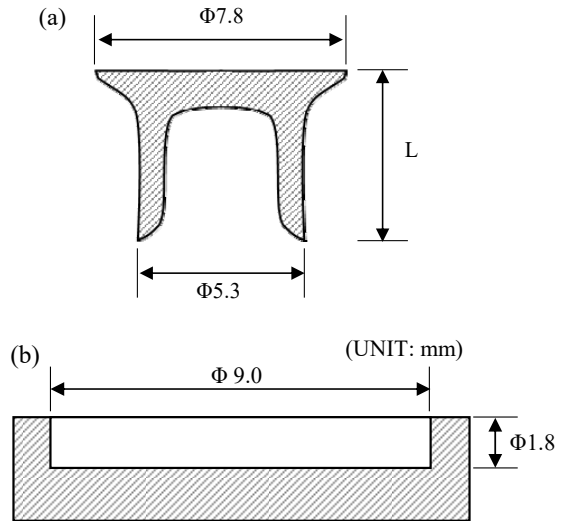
Dimensions of rivet and die, (a) rivet, (b) die
